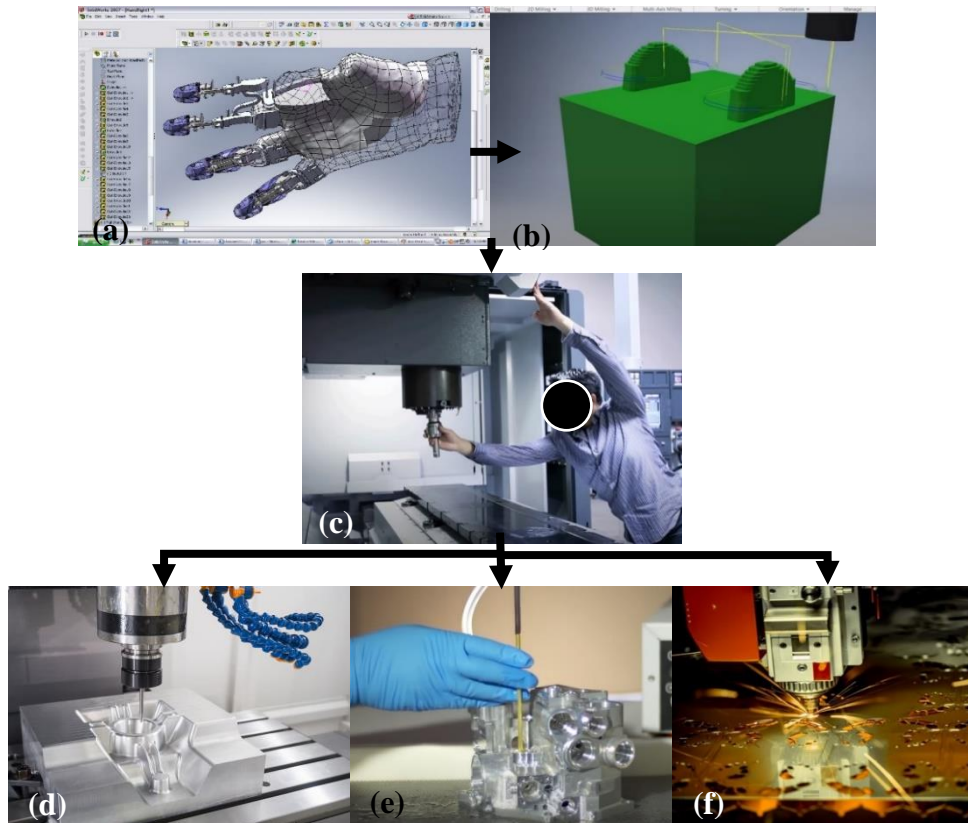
Computer Numerical Control (CNC) Machining: (a) CAD software used for the design of the desired part; (b) CAM software to create a digital programming code for posterior control of the machine; (c) Preparation of the CNC machine; (d) CNC Milling; (e) CNC Electrochemical deburring; and (f) CNC Laser cutting machine (adapted from [175], [177], [179]–[181]).
